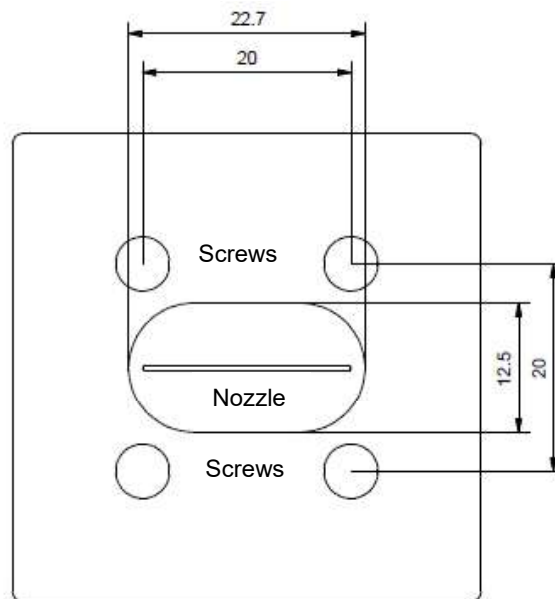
Plate nozzle used for plate extrusion (dimensions in mm)
